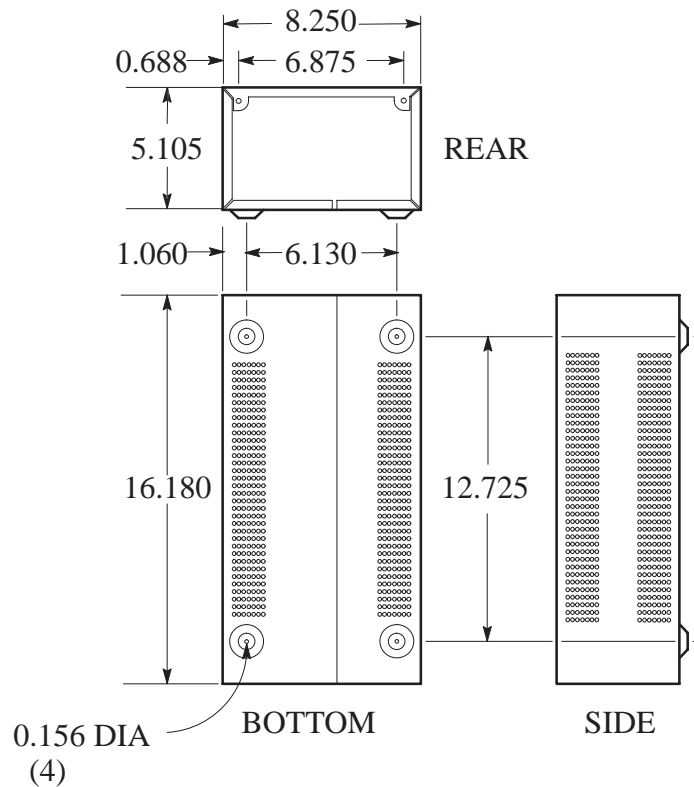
Dimensions of the 1700F00 Plain Cabinet
